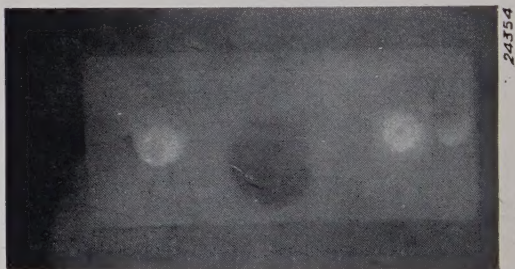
Casting badly fused with the core support, (rectangular plate with two feet), immediately recognizable from the photograph. If black bands may be seen around parts cast in, these parts are practically loose (chance of leakage or fracture).
